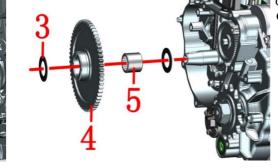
LEFT CRANKCASE		ZT158MJ electric starter assembly -1	СНК
